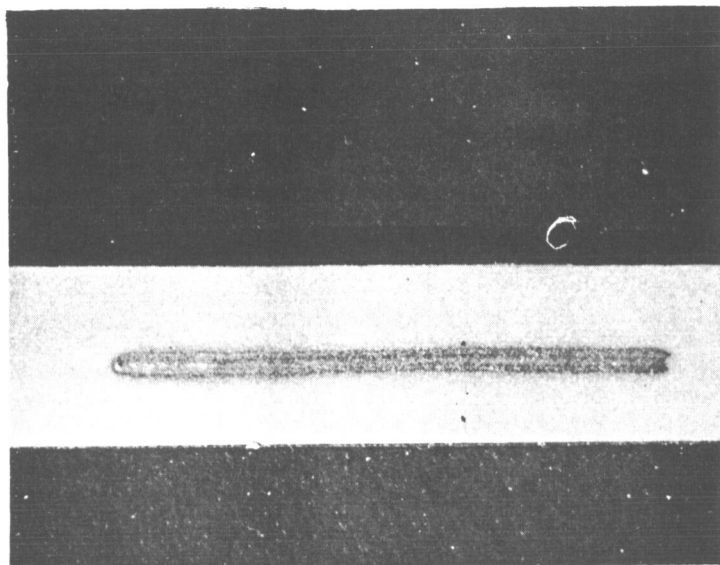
Photomacrograph revealing René 41 seam weld. Weld schedule: 1.99 volts, 12 lbs. pressure, 30 inches/minute speed. 1X
